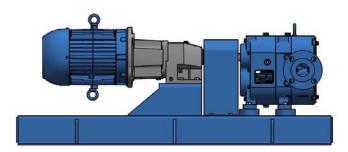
Standard in-line configuration with electric motor and NEMA C-face gear reducer. Motor mounting will vary by motor size.
